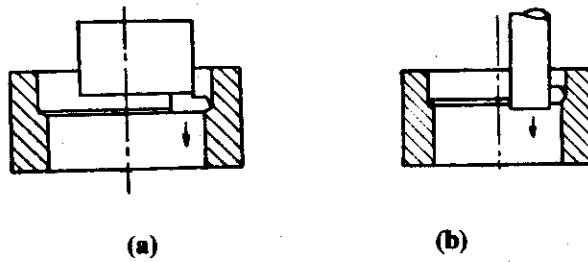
(a) Boring by tool head (b) Boring by boring bar
